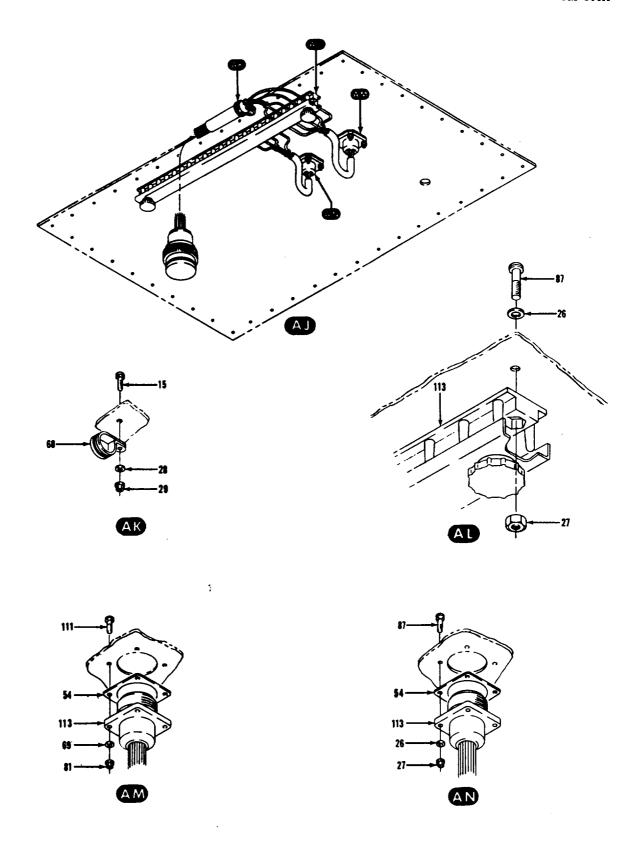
Electrical Equipment Installation (Sheet 12 of 19)
